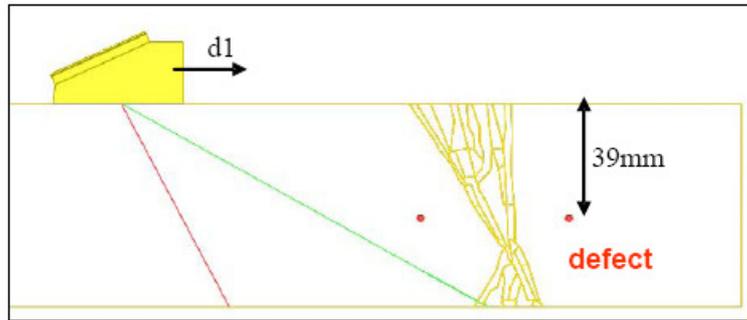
Configuration of inspection of a side drilled hole located in the nozzle
